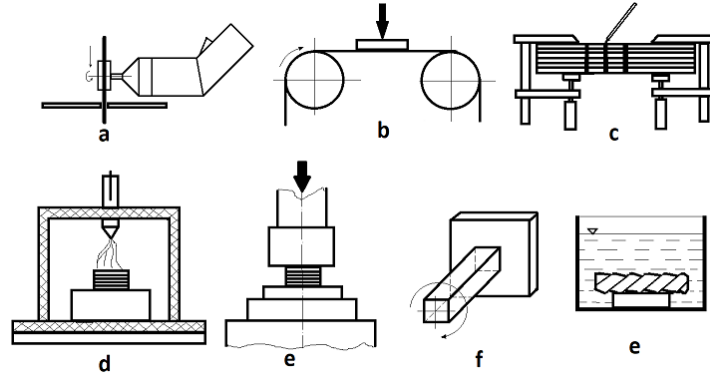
Schematic representations of the main operations for making a sample of Damascus steel: a – cutting; b – removal of oxides; c – welding of the strip package; d – heating in the oven; e – free forging; f – twisting; g – passivation.
